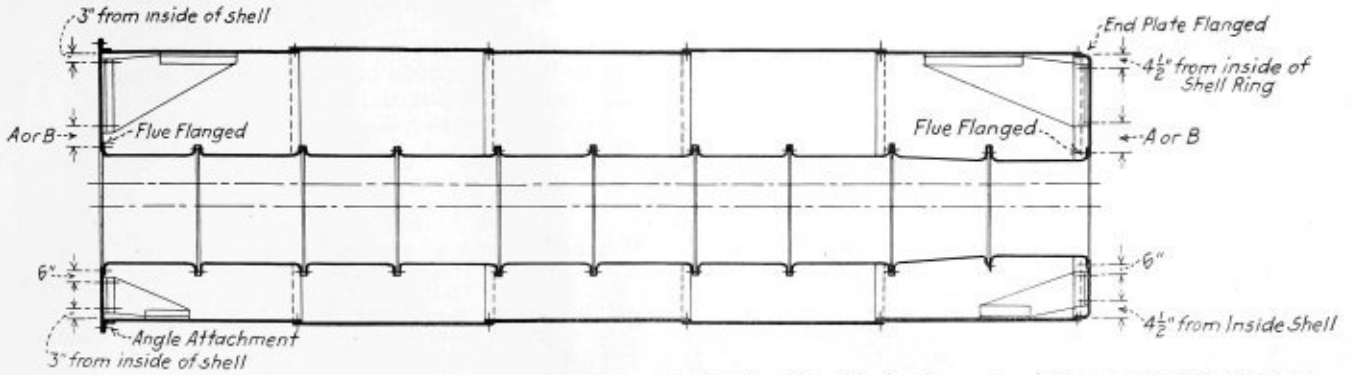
Showing Boiler with Plain Flues Throughout and Having Flue Ends Flanged and Riveted to End Plates
